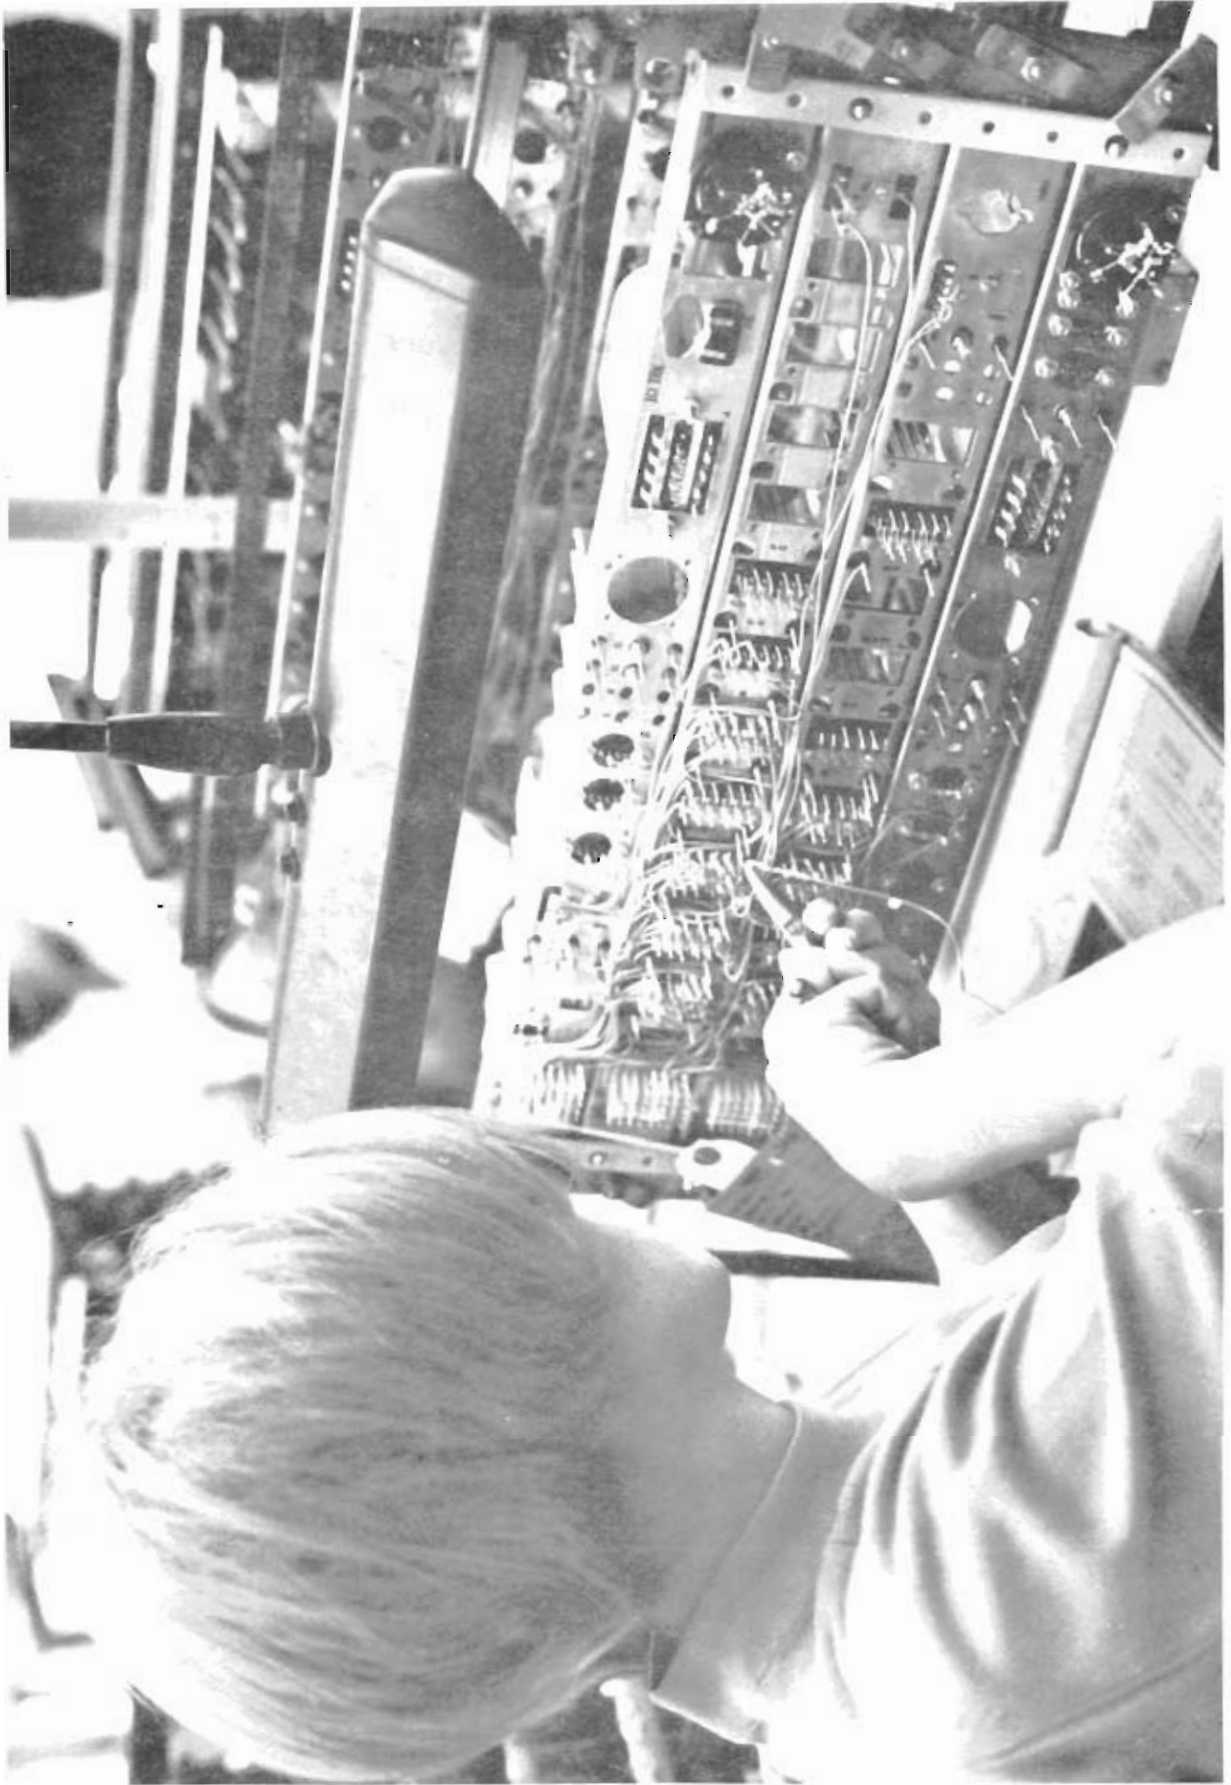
SURFACE WIRING OF A 4 PLATE MOUNTING UNIT
